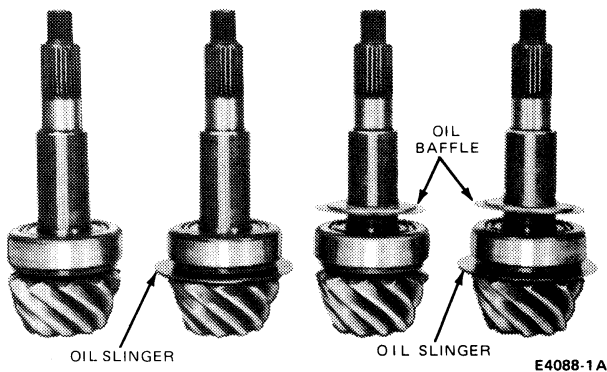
Pinion Oil Slinger and Oil Baffle Locations
